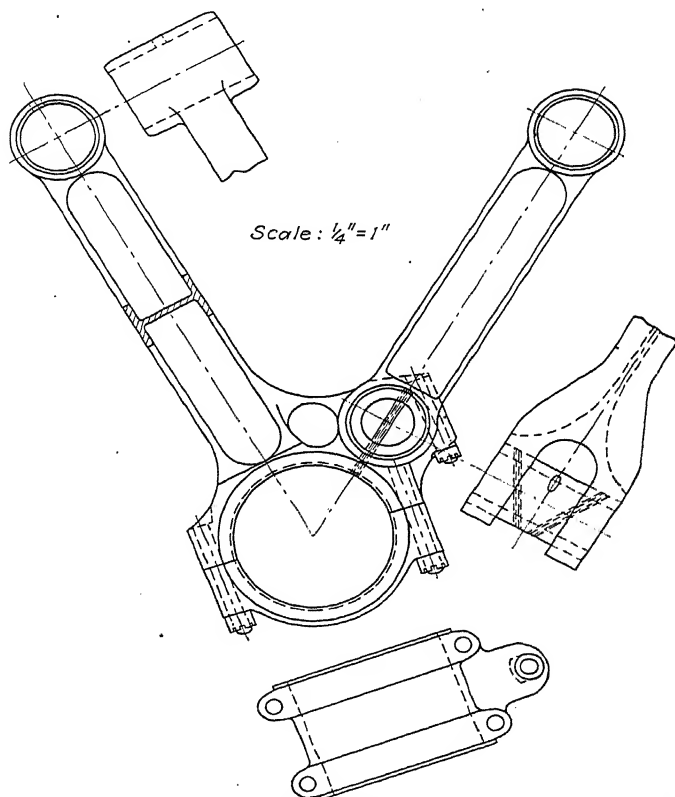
Master and articulated connecting rod used in the Packard 2500 airplane engine.
